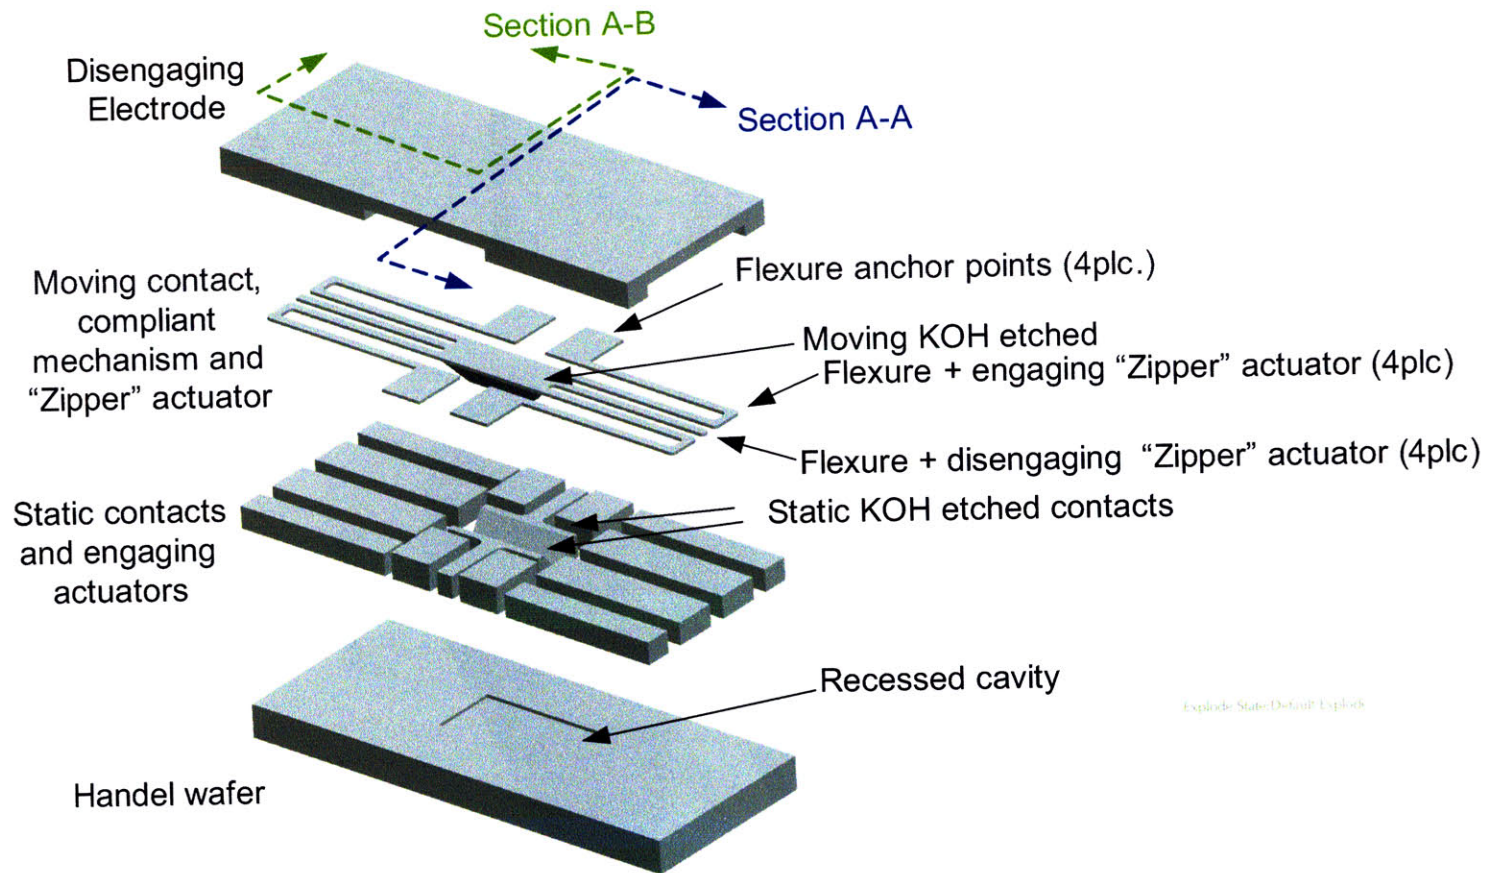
Concept for an out-of-plane motion MEMS relay with  $\{111\}$  contacts. Exploded assembly view
